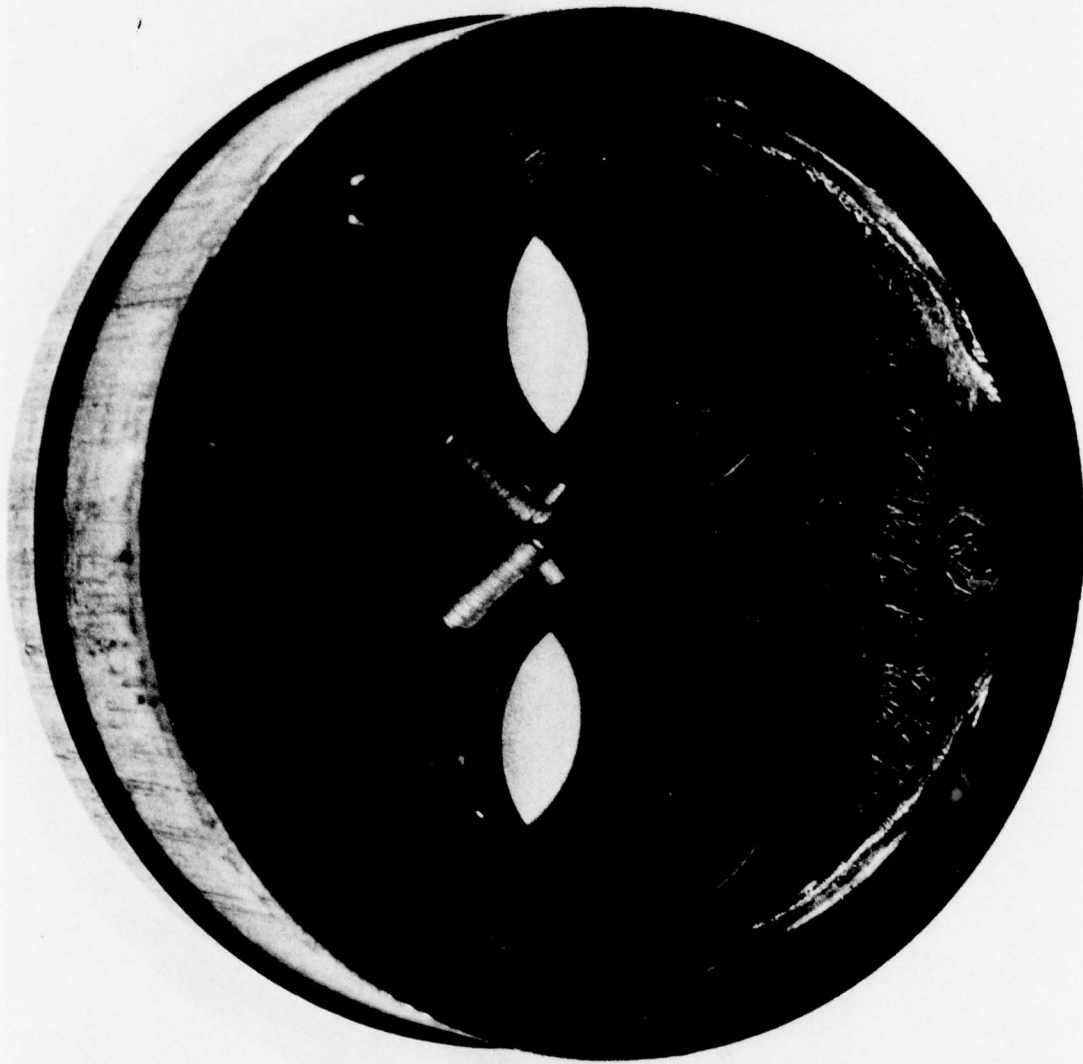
Supply Pump Rear Bearing Assembly Package No. 1
